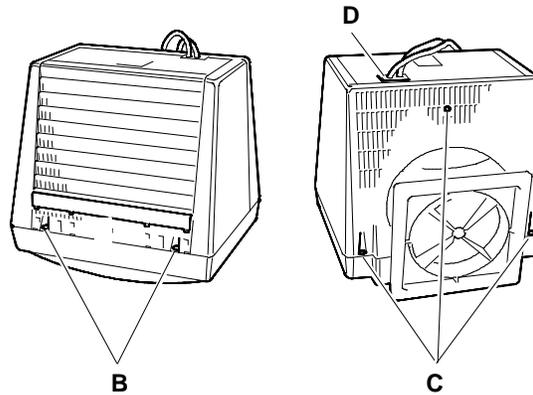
Removal of 6 Screws Securing the Video Cover
